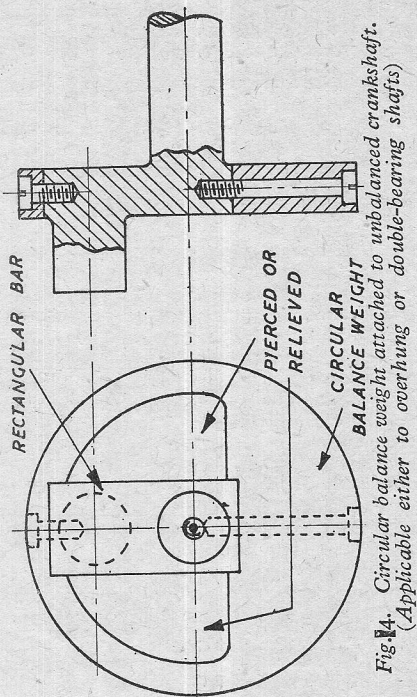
Circular balance weight attached to unbalanced crankshaft. (Applicable either to overhung or double-bearing shafts)
